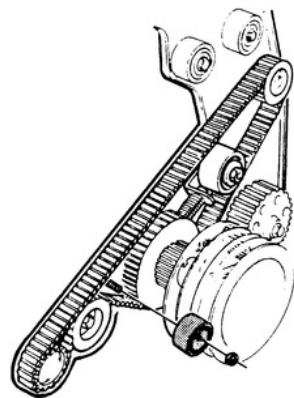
Remove the tensioner pulley to remove the balance shaft
